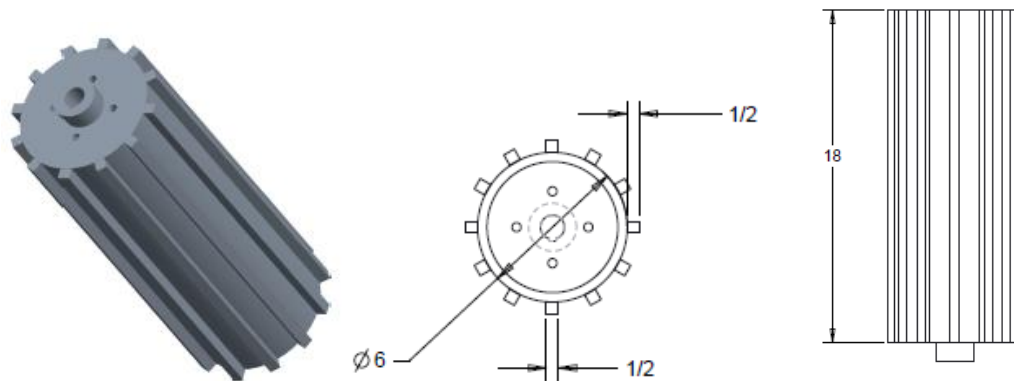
The pinch-roller drum (left), front view (center) and top view (right) schematic (all dimensions in inches)
